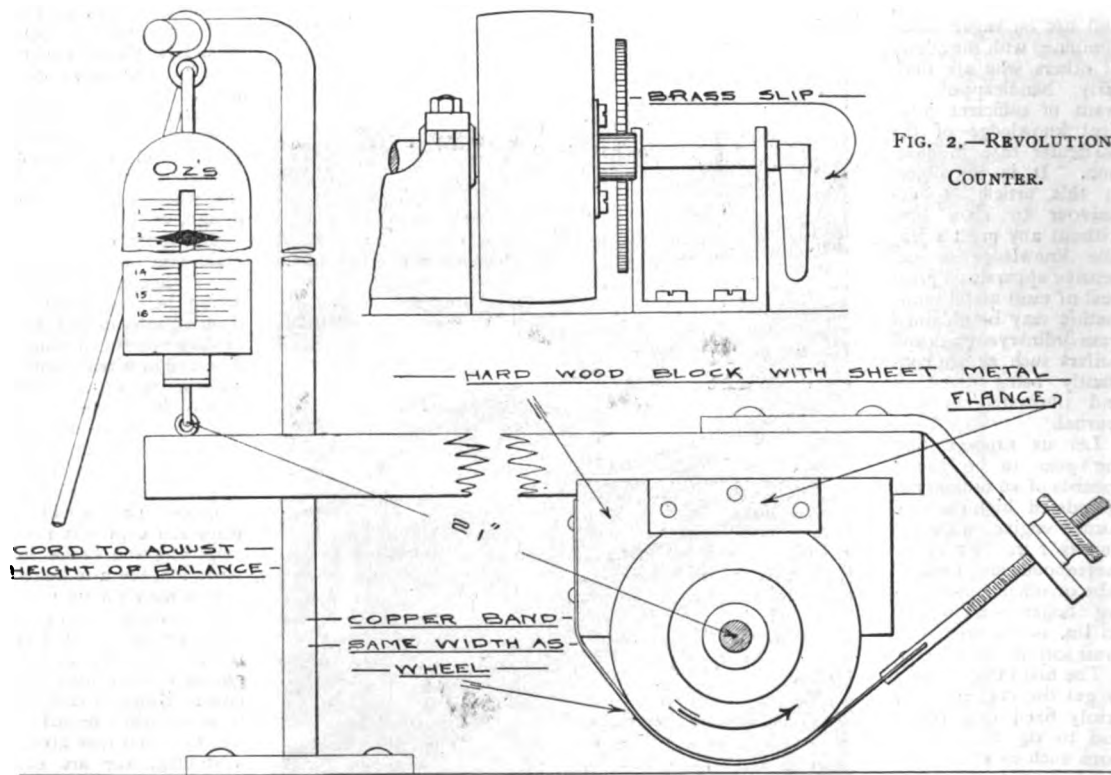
BRAKE FOR TESTING SMALL POWER ENGINE.
